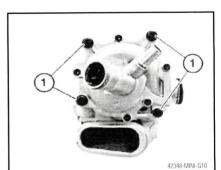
Showing the location of the water pump mounting bolts—Cooper S Coupe
